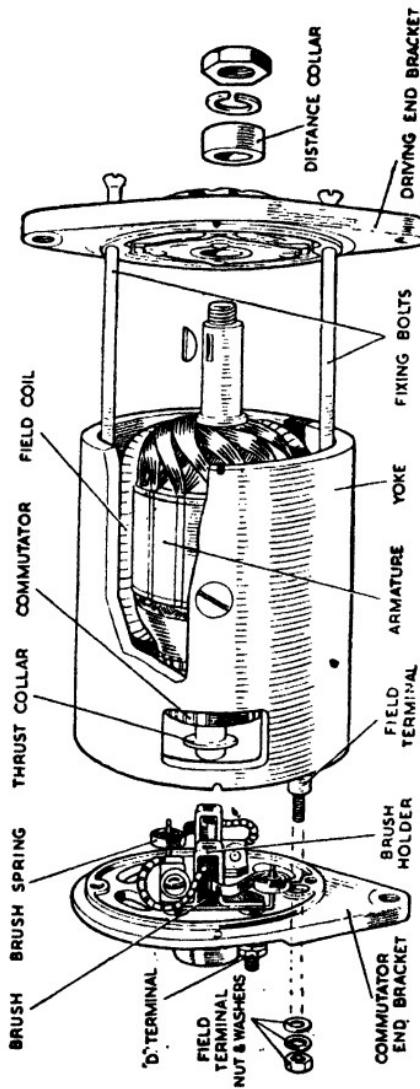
Exploded View of Lucas Standard Pattern Car Generator.
